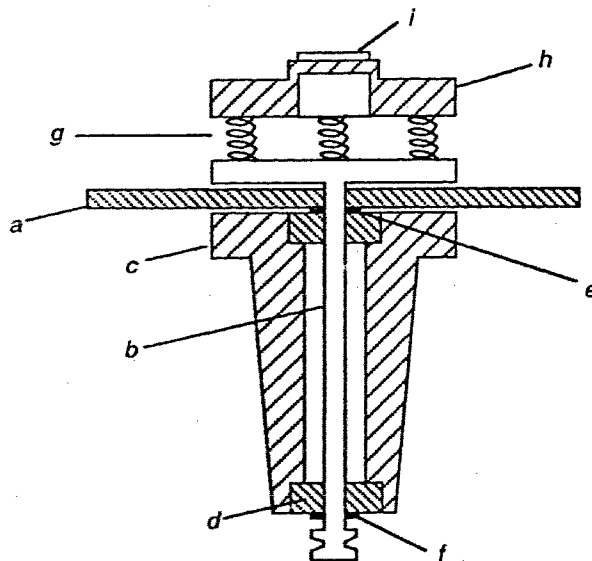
Sample rotation stage: *a*, platform of the positioner; *b*, rotating shaft with one end connecting to the rotation plate and the other end to a pulley which is driven by a DC motor; *c*, shaft housing which is mounted on the platform; *d*, ball bearings; *e*, several 60 μm thick flat rings; *f*, flat rings and an axially assembled external ring; *g*, springs and adjusting screws (not shown); *h*, sample chamber or total-electron-yield detector housing; *i*, sample.
